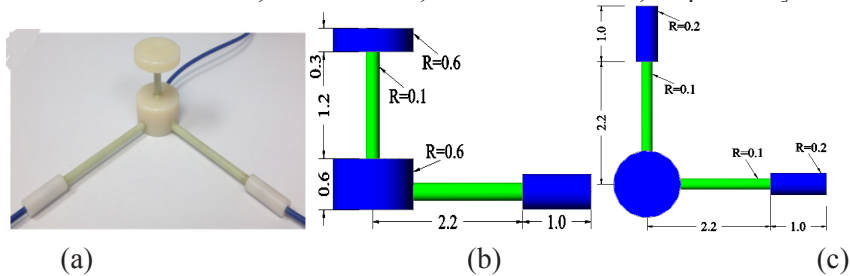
Geometric Design of The 3D GFRP-FBG Sensor: (a) Photo of The 3D GFRP-FBG Sensor, (b) Elevation View, and (c) Plan View (Unit: in.).
